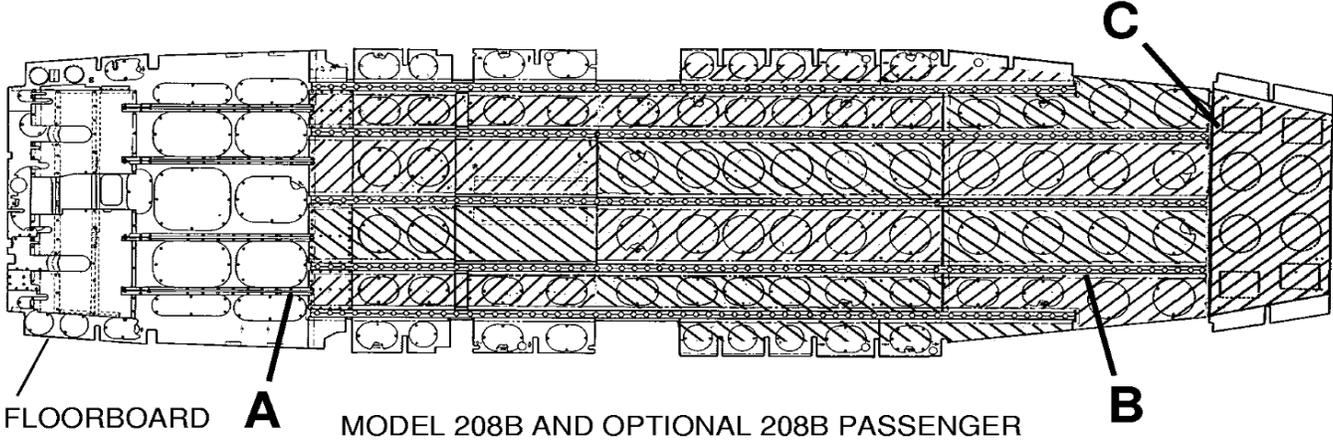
Sheet 2 : Floorboard Access Plates and Seat Rails
